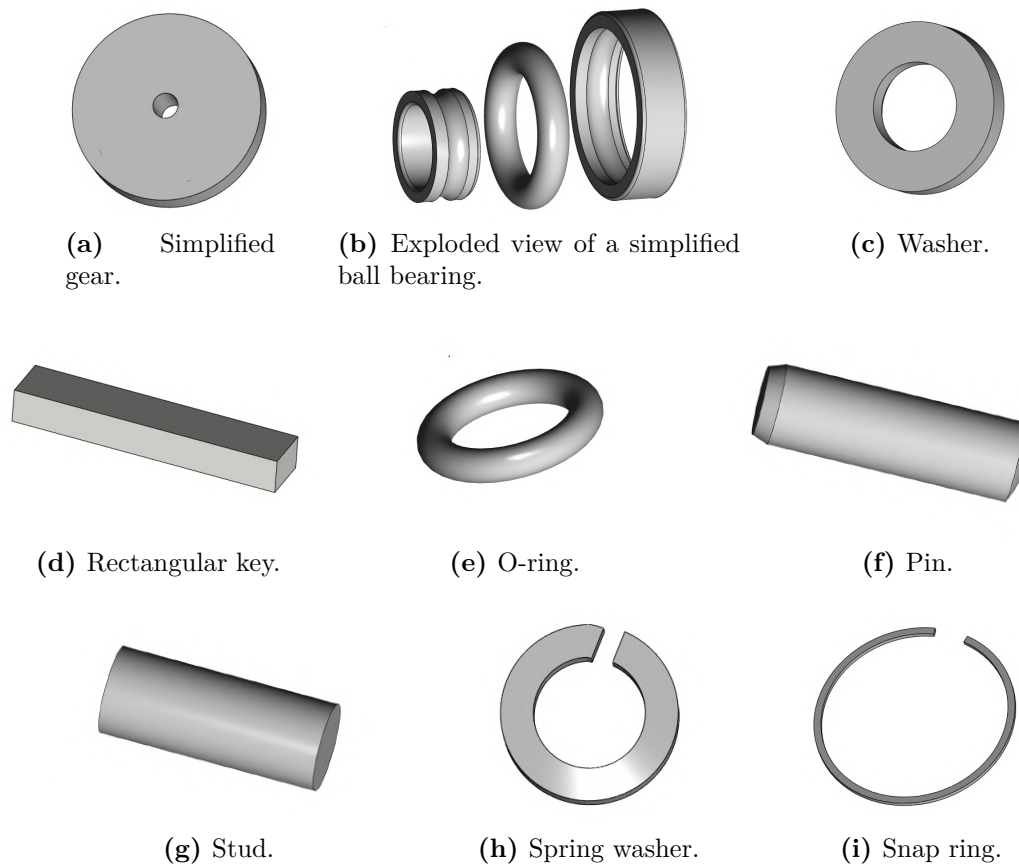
Examples of CAD models of mechanical parts with shape similar to other parts.
